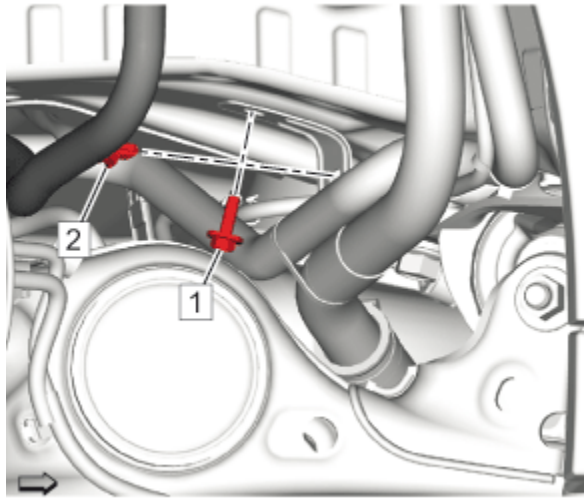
Fuel Tank Filler Pipe Ground Bolt And Wiring Harness Clip
